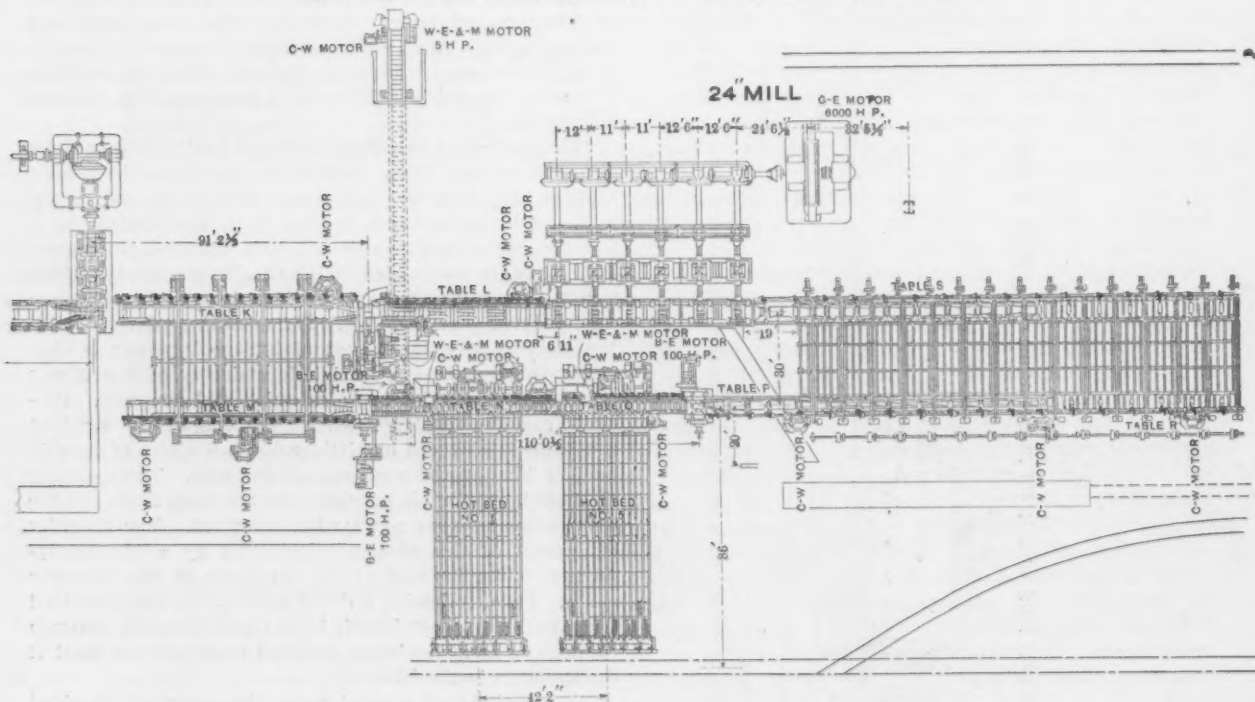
The 24-In. Mill Shown on a Larger Scale Than in Fig. 1.
